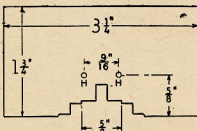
Shield for p.p. 6J6 stage, showing cutout to allow fitting over the socket and its associated fixing bolts.
